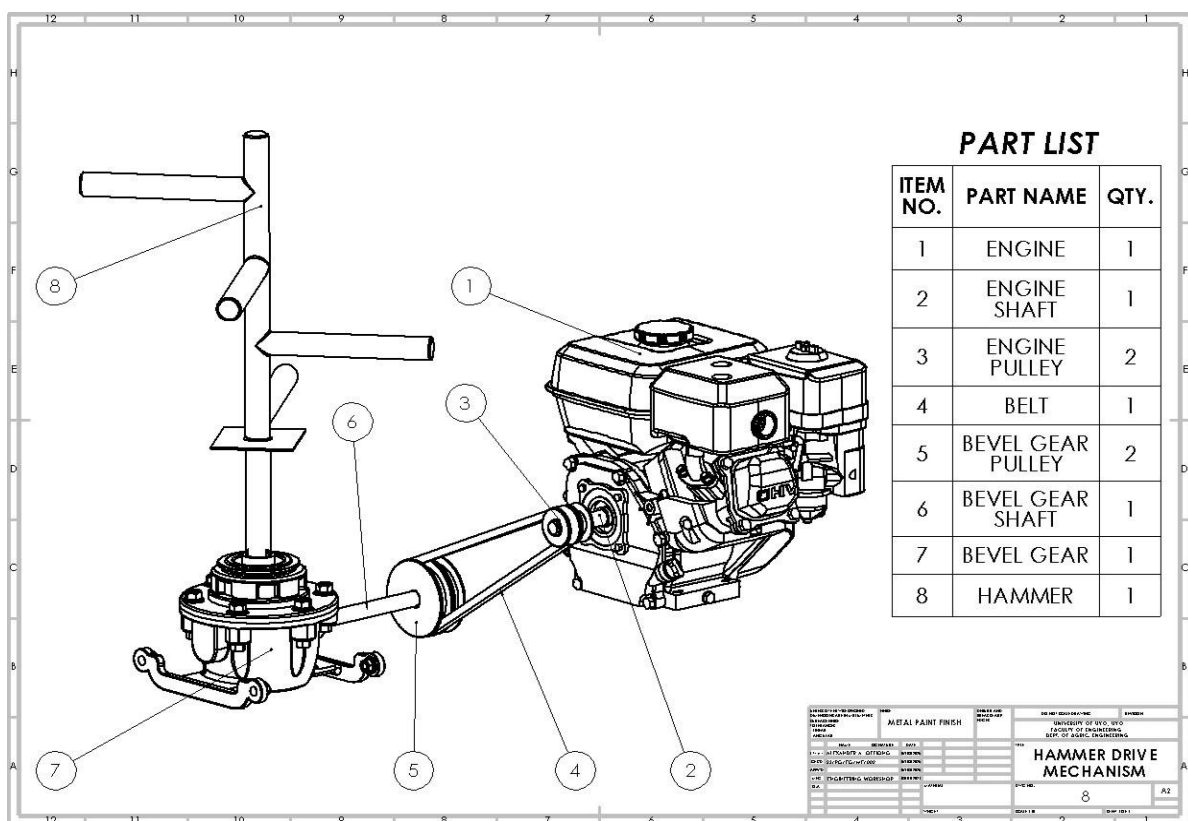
Component drawing of the vertical palm fruit digestion machine (Hammer Drive Mechanism) by Reseracher (2025)
